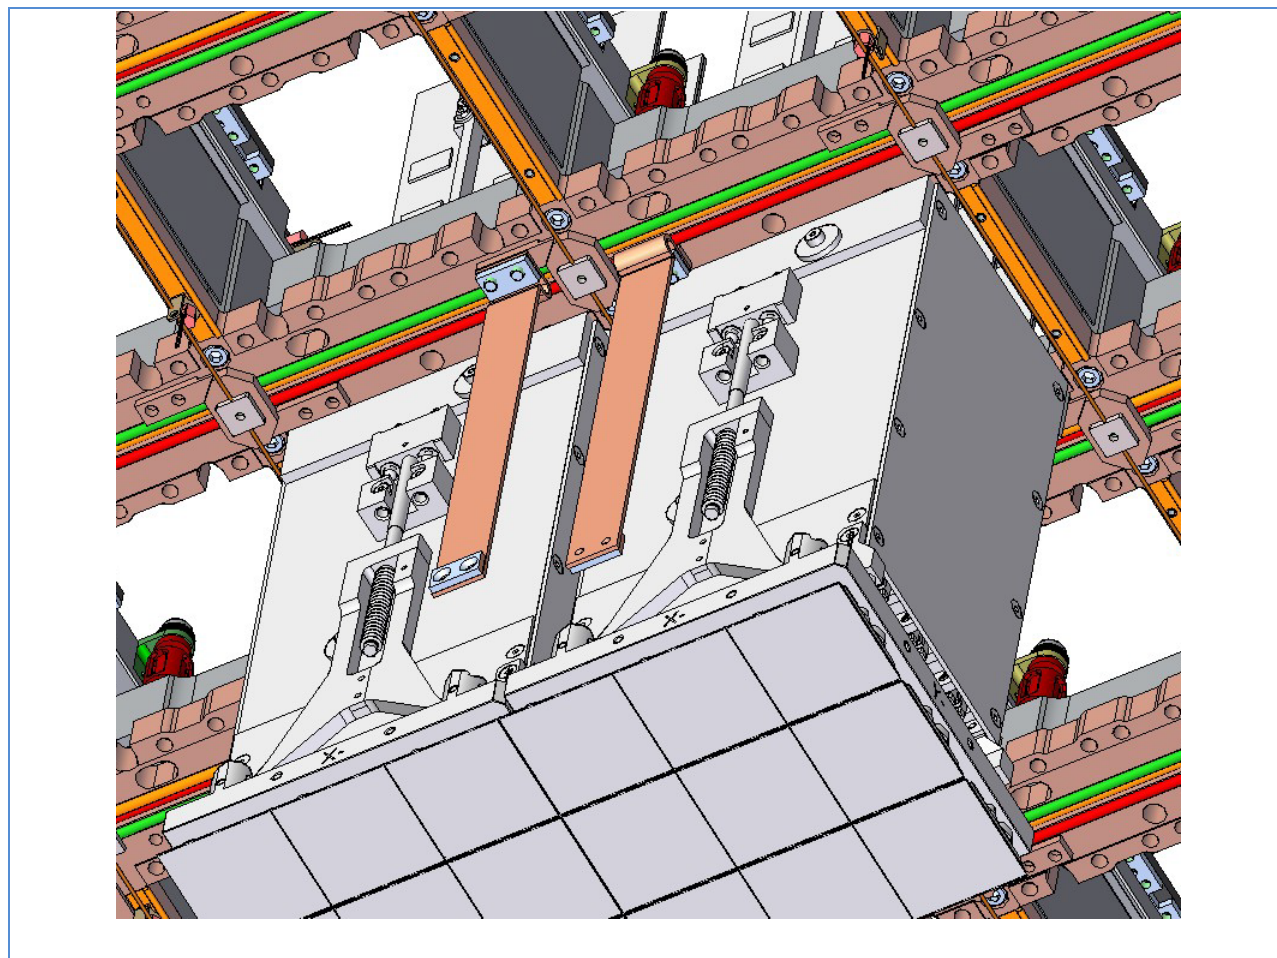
Detail of bolted joint of raft electronics crate to cryoplate
